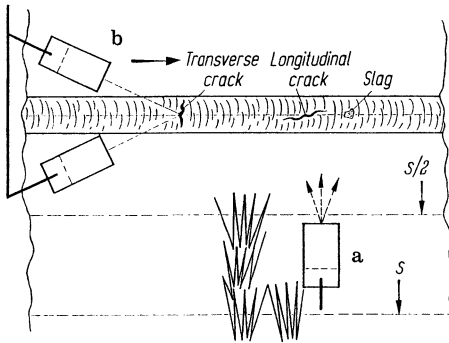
Longitudinal scanning of a weld. a For all defect types except transverse cracks; b for transverse cracks
